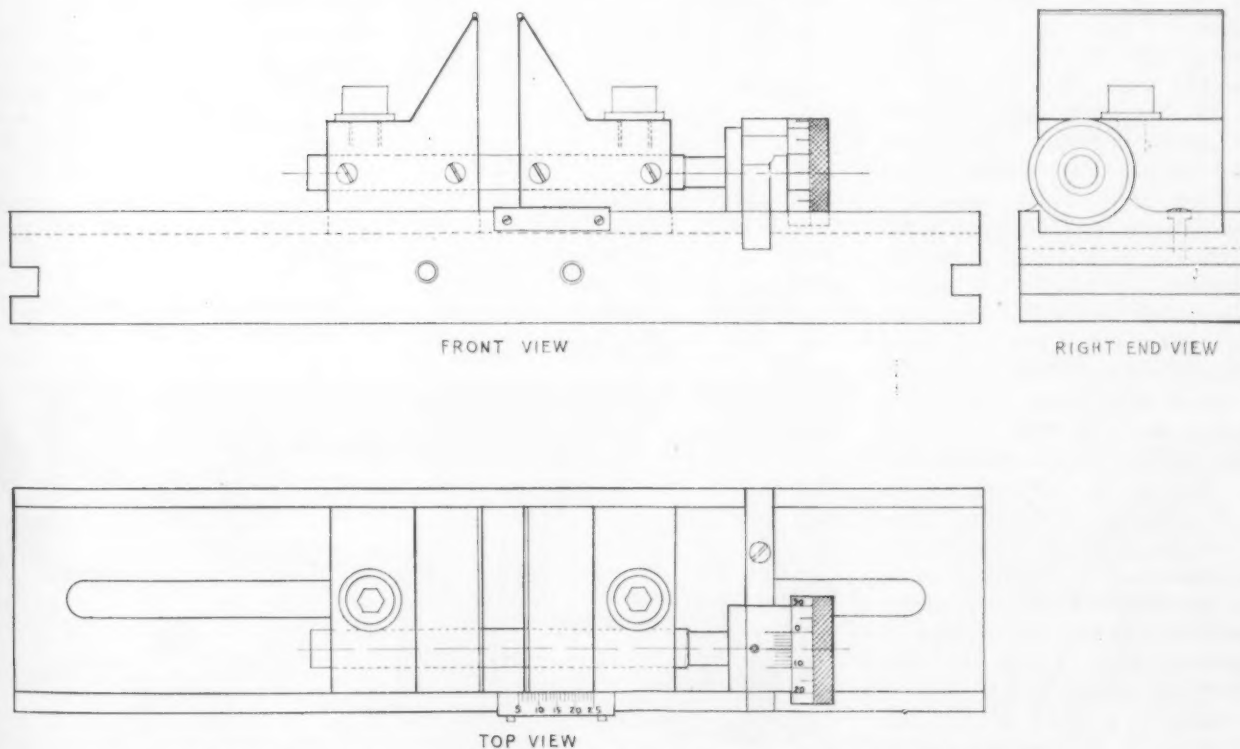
Assembly Drawing of Variable-Span Flexure Test Jig with $\frac{1}{32}$ -in. Radius Supports.
